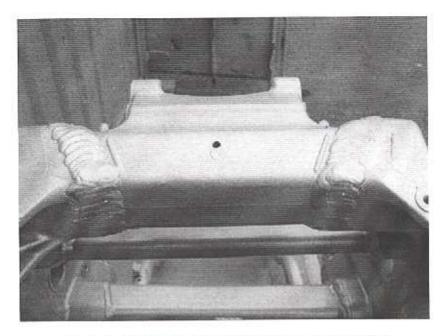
Subject crossmember & Welds - Bottom View
